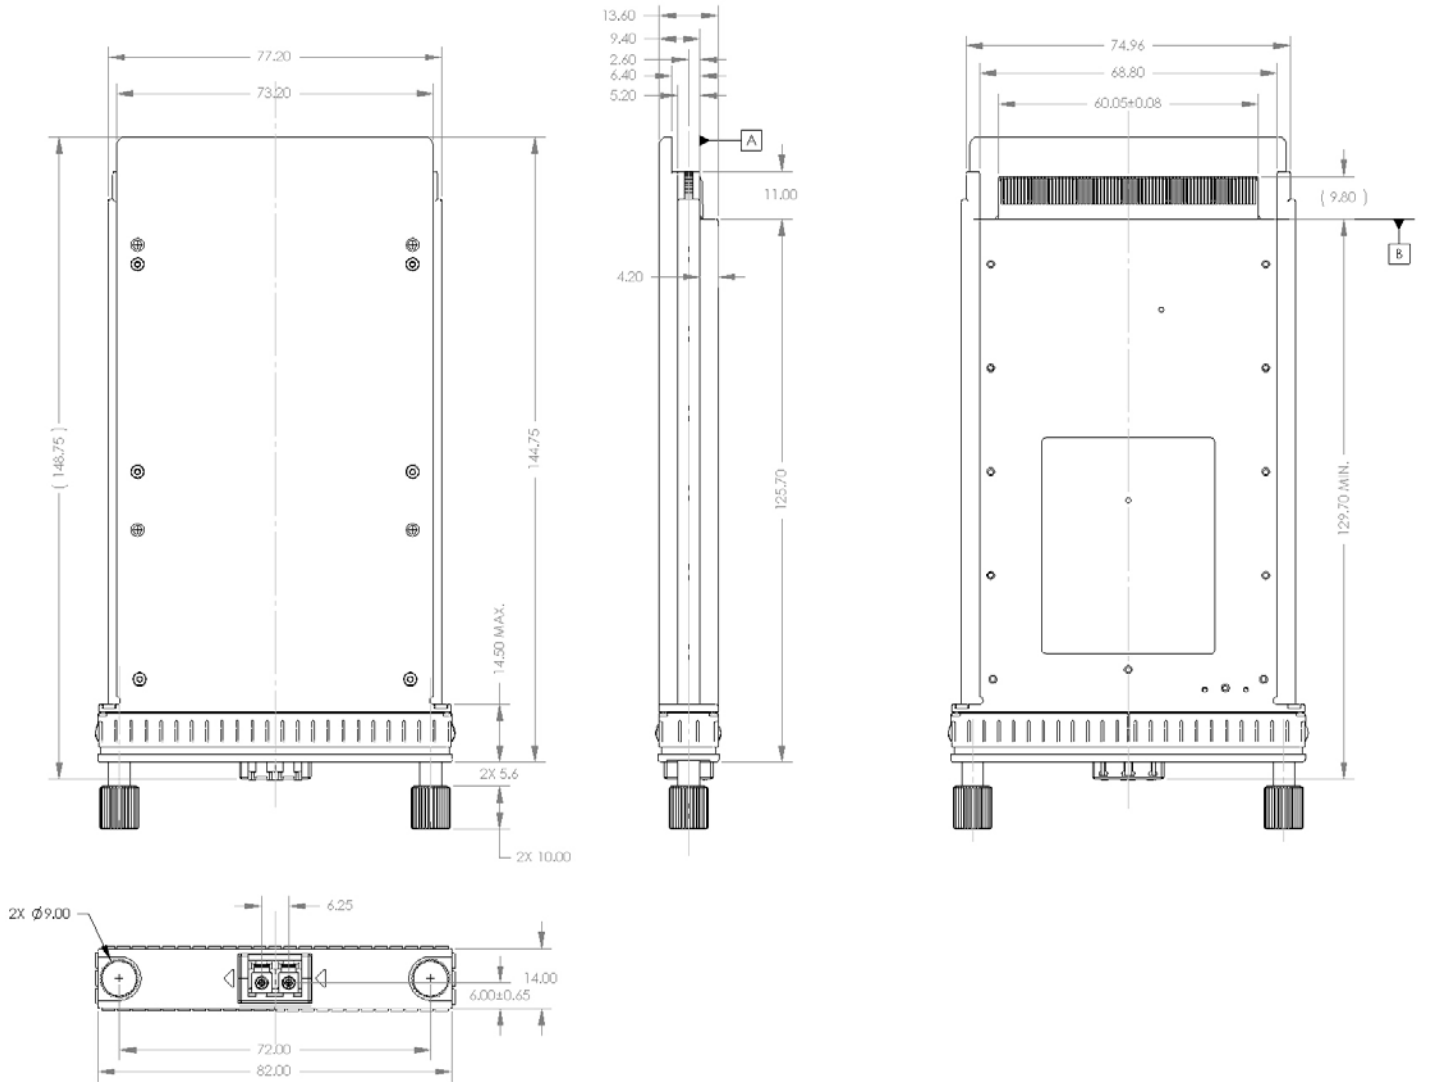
FTLC1181RDNL Mechanical Dimensions.
